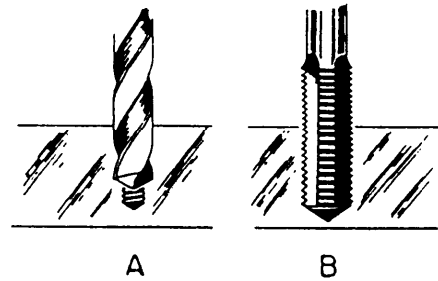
Removing a broken bolt and retapping the hole to a larger size.
